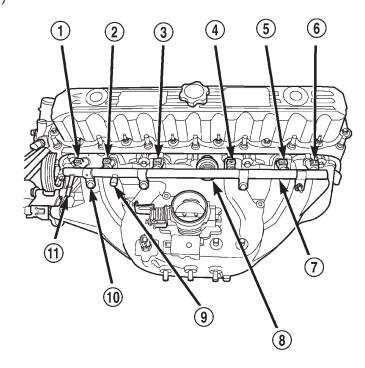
Remove/Install Fuel Injector Connector— 2.5L/4.0L Engine
